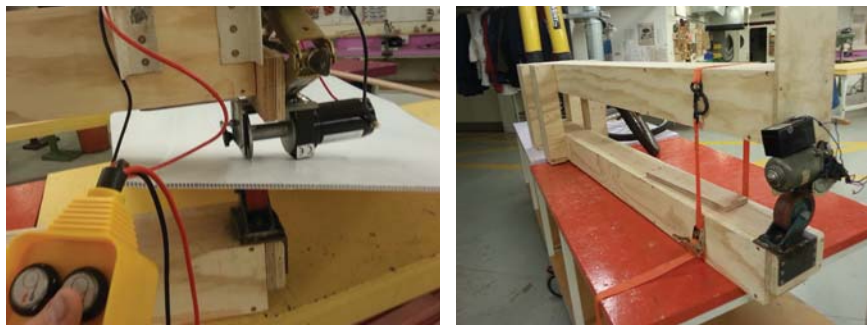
Prototype tool for pressing polypropylene sheet material. The machine uses a jack to create the correct pressure with a wheel and winch motor to guide and control the press.
